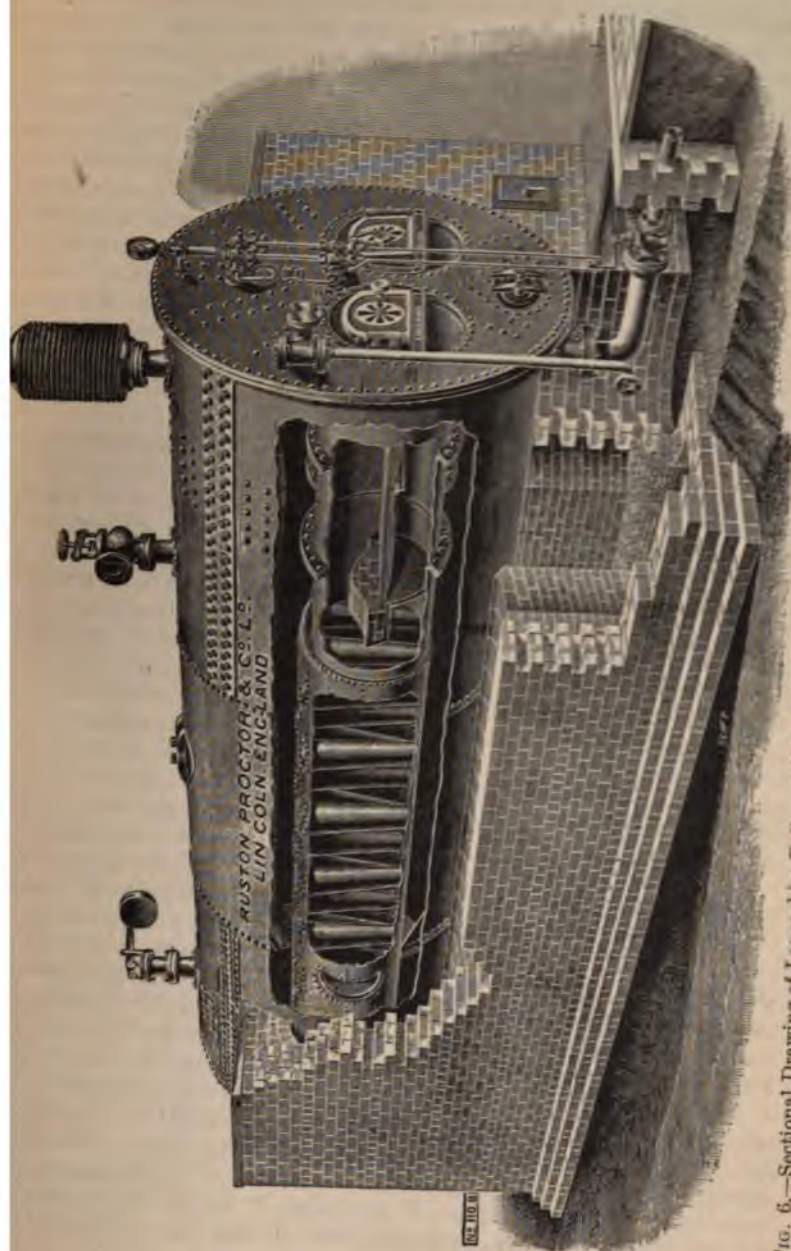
Sectional Drawing of Lancashire Boiler with Cone Tubes. The Brickwork is removed to show the Side and Under Flues.
